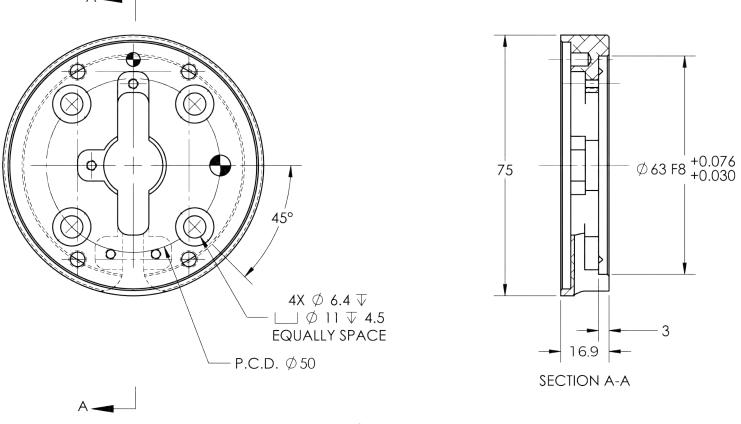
Coupling for ISO 9409-1-50-4-M6.
